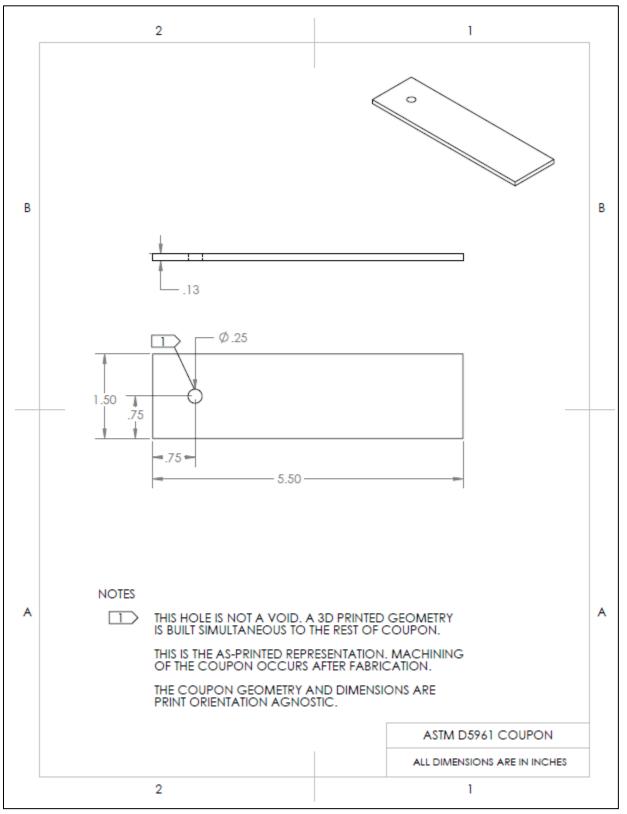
As-printed drawings used to develop the CAD model for single shear bearing specimens.
